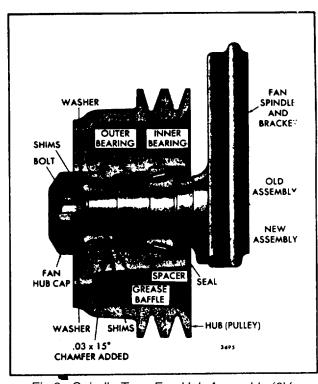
Spindle Type Fan Hub Assembly (6V Engine
